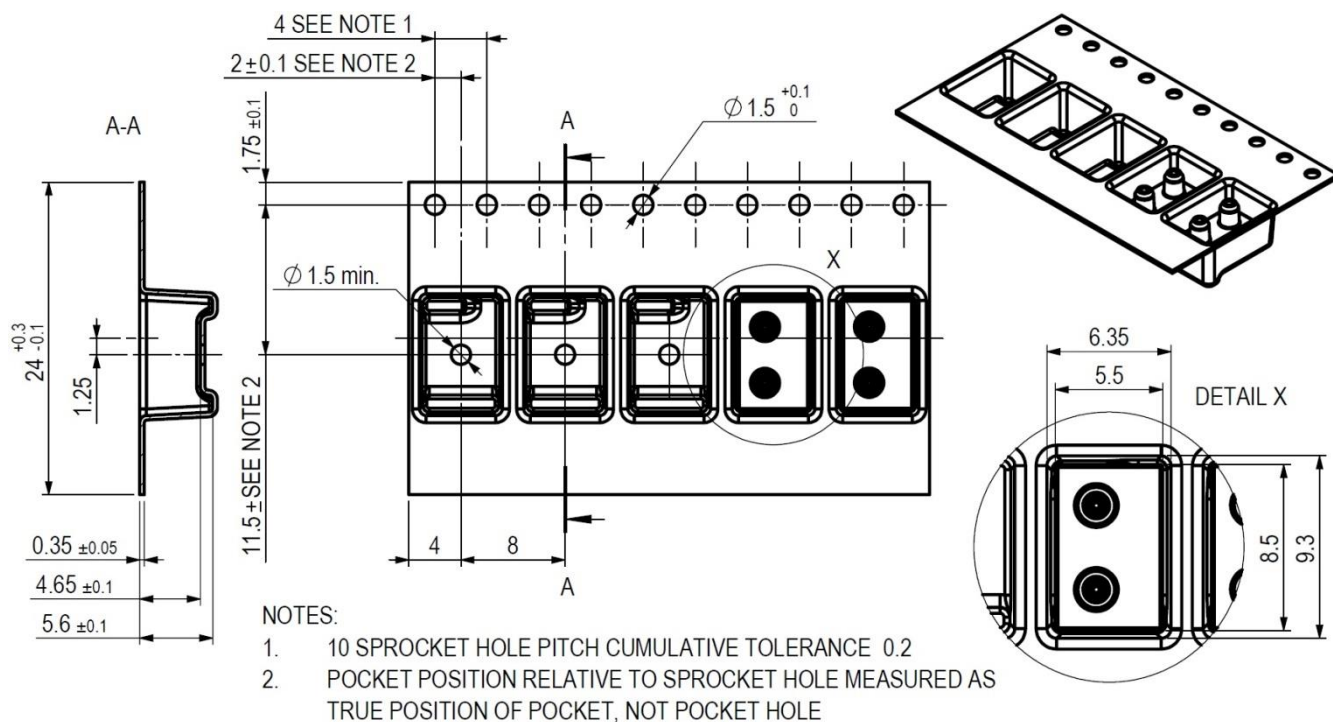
Sketch of packaging tape and sensor orientation. Header tape is to the right and trailer tape to the left on this sketch
